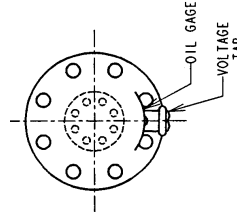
Relative locations of flange, oil gauge, voltage tap, and bottom terminal
